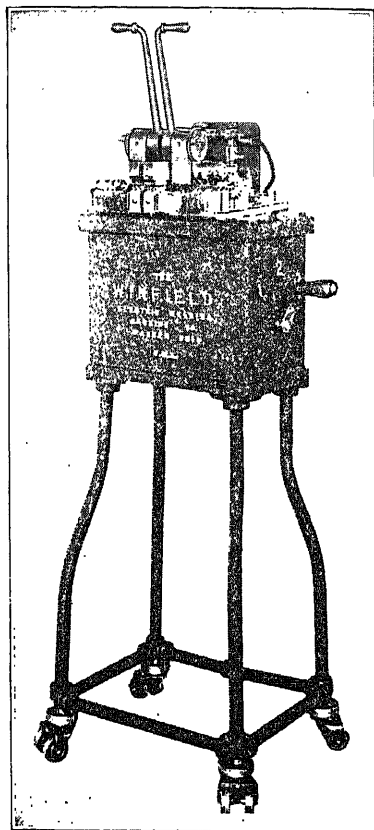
Winfield Portable Butt-Welding Machine.
